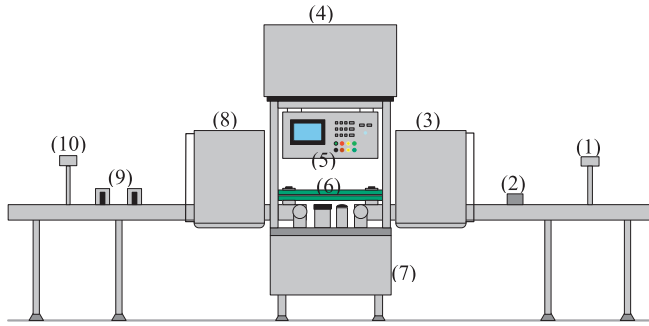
Structure diagram of the empty bottle inspection system (1) Initial inspection (2) Residual liquid inspection (3) Bottle wall inspection (4) Operation and control unit (5) Control panel and bottle mouth image acquisition device (6) Bottle bottom image acquisition device (7) Gearing (8) Bottle wall inspection (9) Reject apparatus (10) Rejection confirm.
